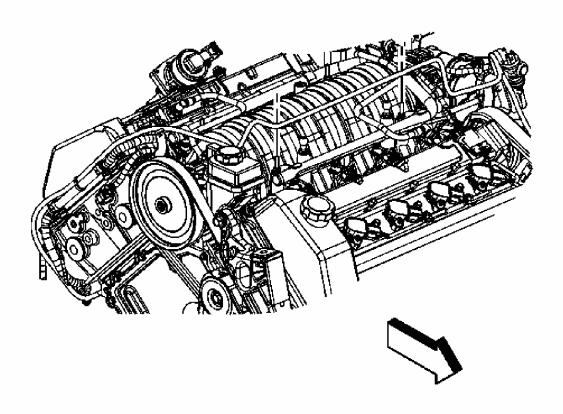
Locating Coolant Heater Cord Tabs Courtesy of GENERAL MOTORS CORP.
